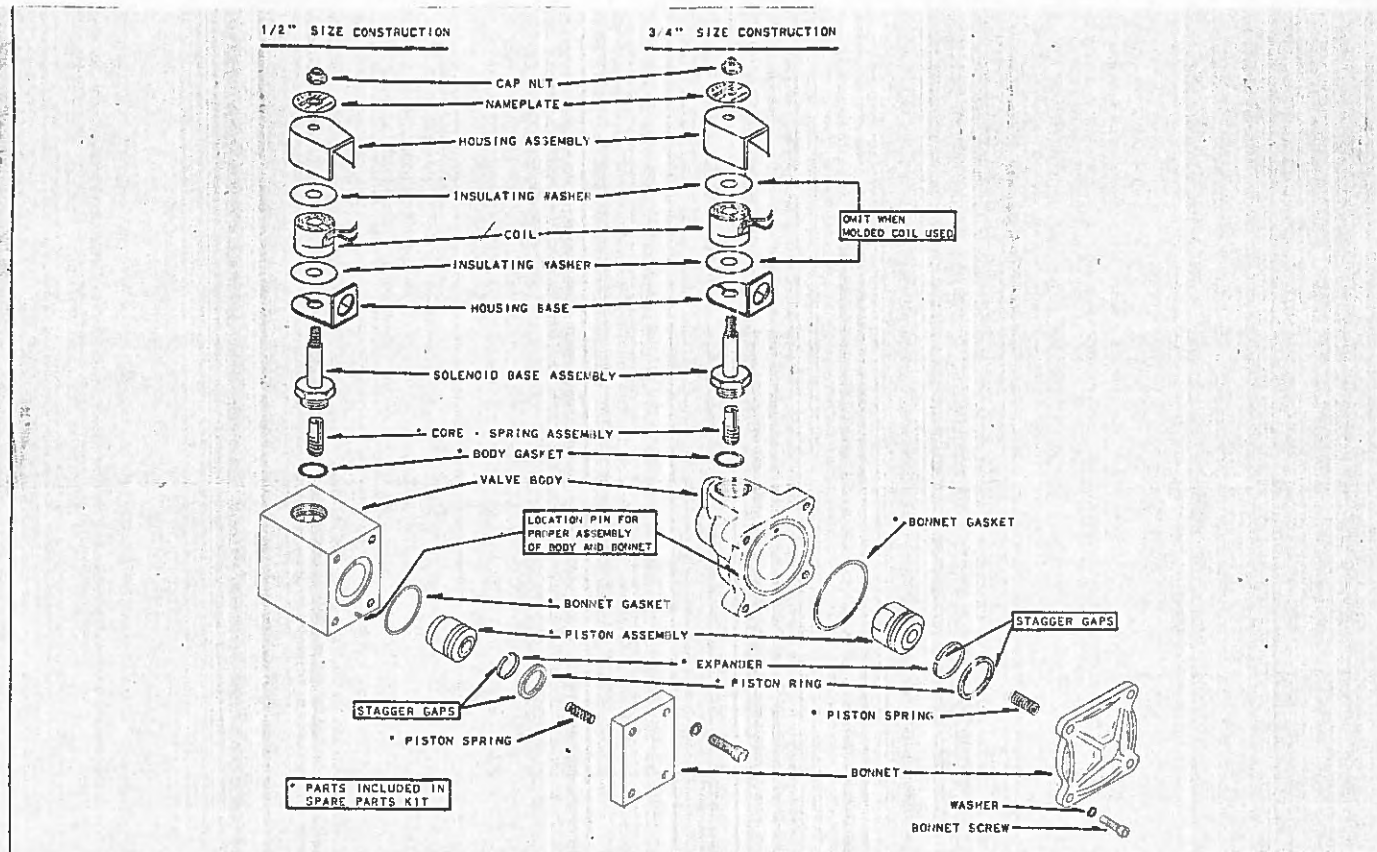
Bulletin 8223 - 1/2 & 3/4 NPT Construction
